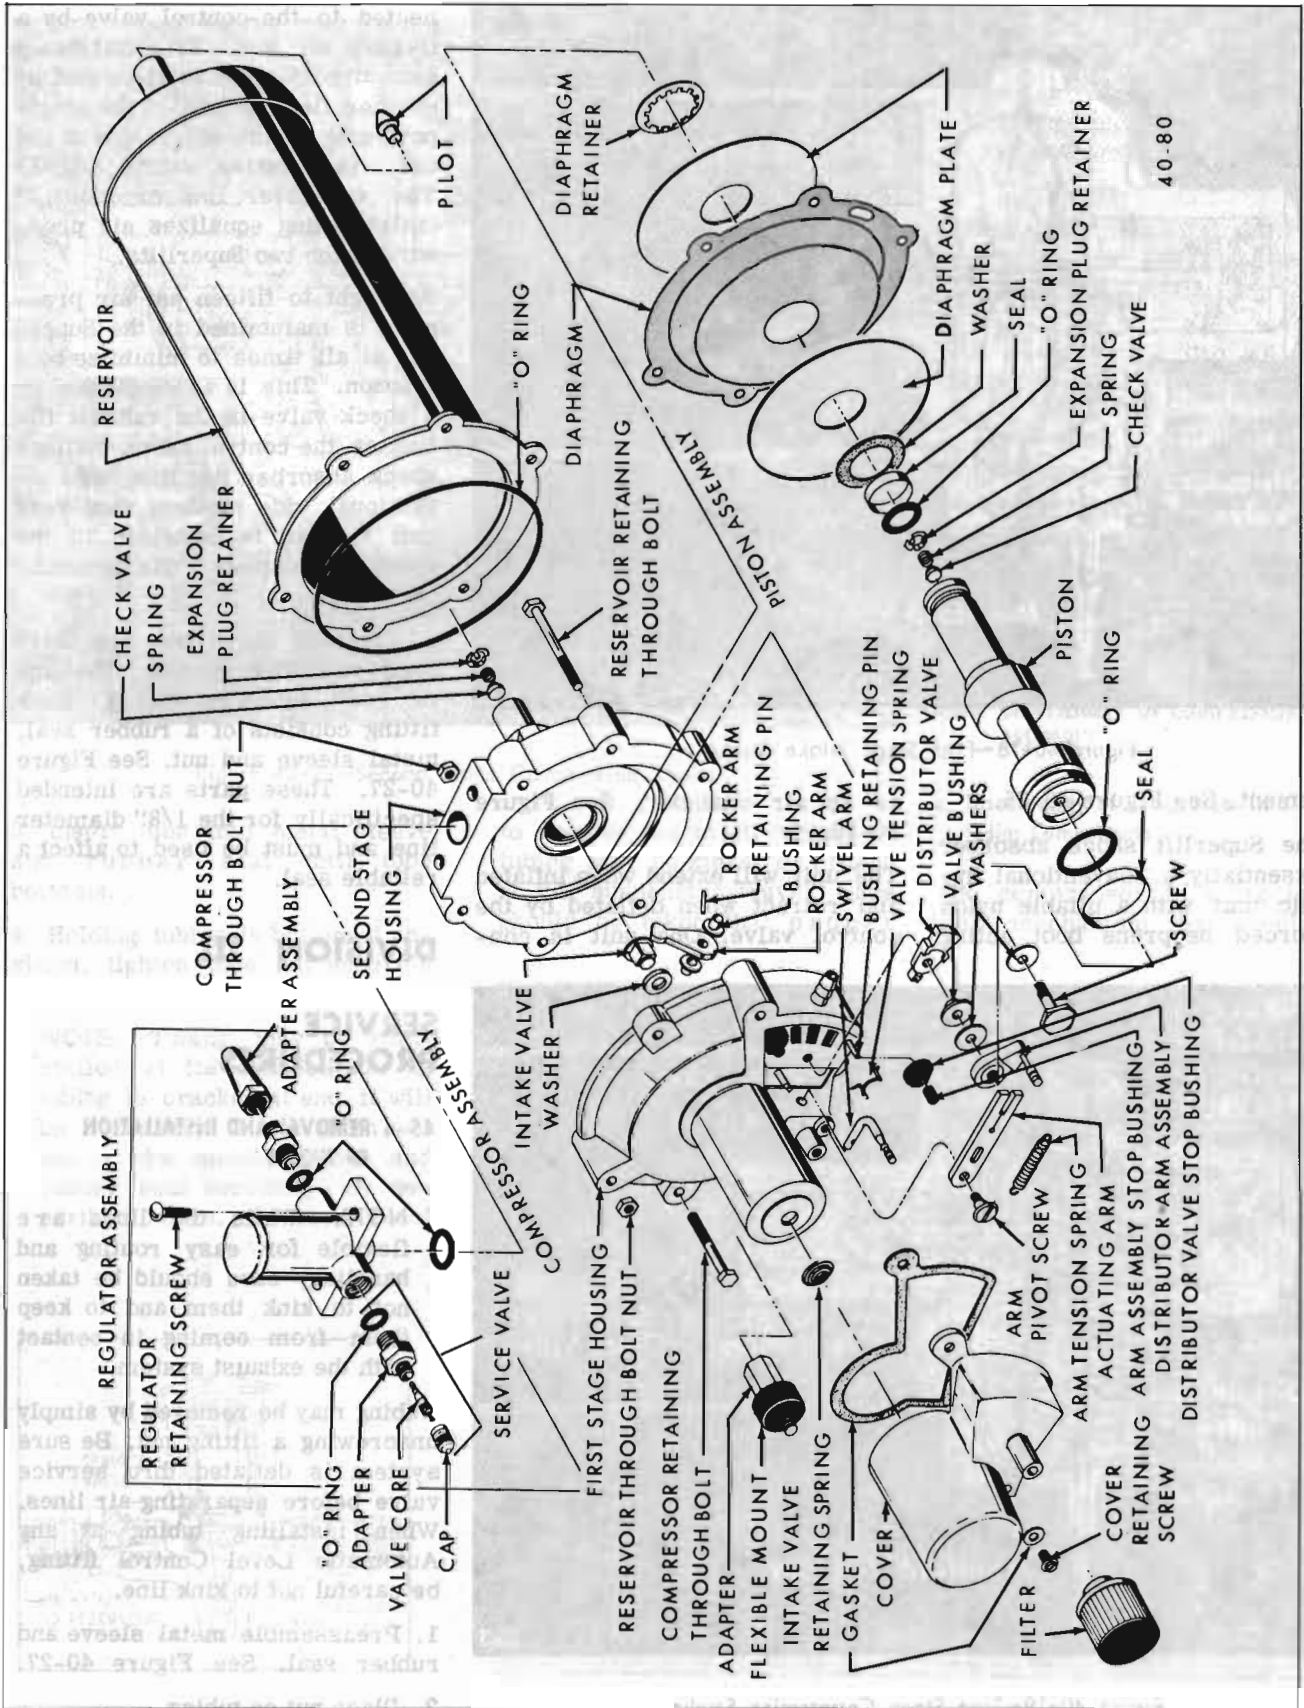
Compressor, Reservoir Tank and Regulator Valve Assembly - Exploded View
